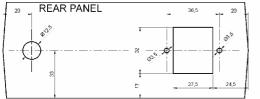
& 8 provides a drill pattern for our optional enclosure (ref. TKAUS22G).
